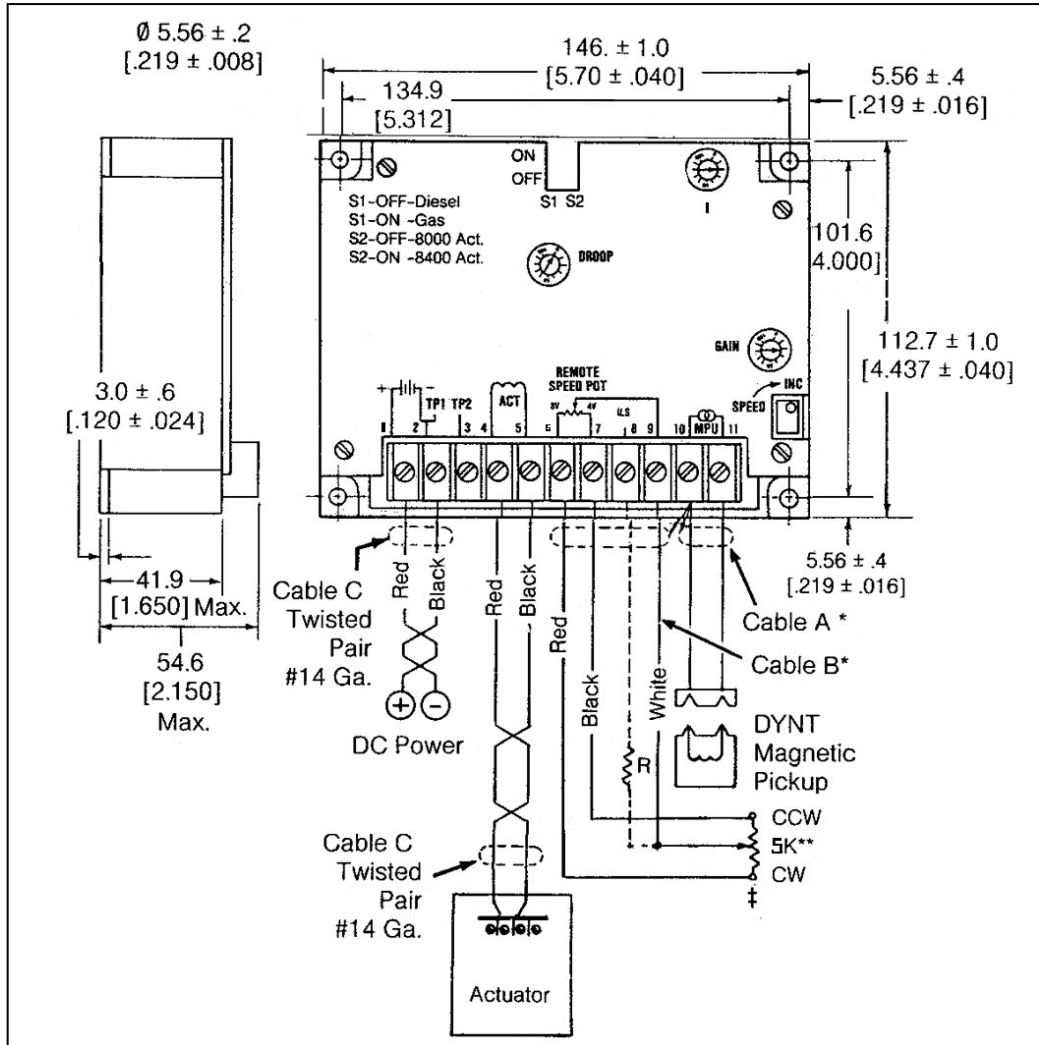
Dimensions & Wiring Diagram for 8270-1072 Controller
